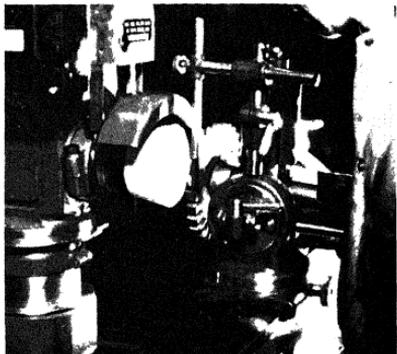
Grinding the side teeth of side-milling cutter.
